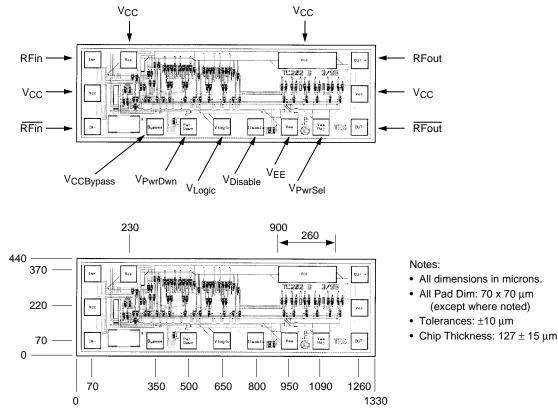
HMMC-3024 Pad Locations and Chip Dimensions.
